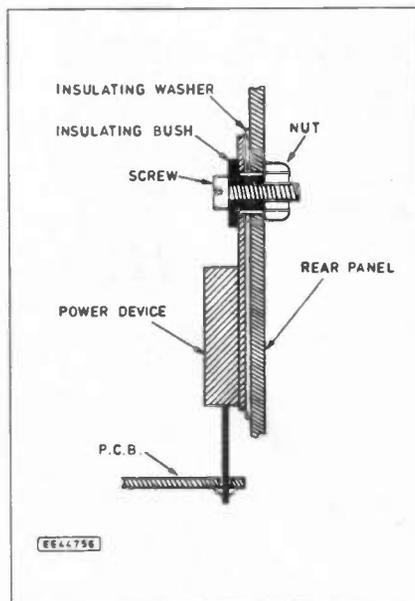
The correct assembly of the mounting bushes and insulating washer for mounting the power devices.
